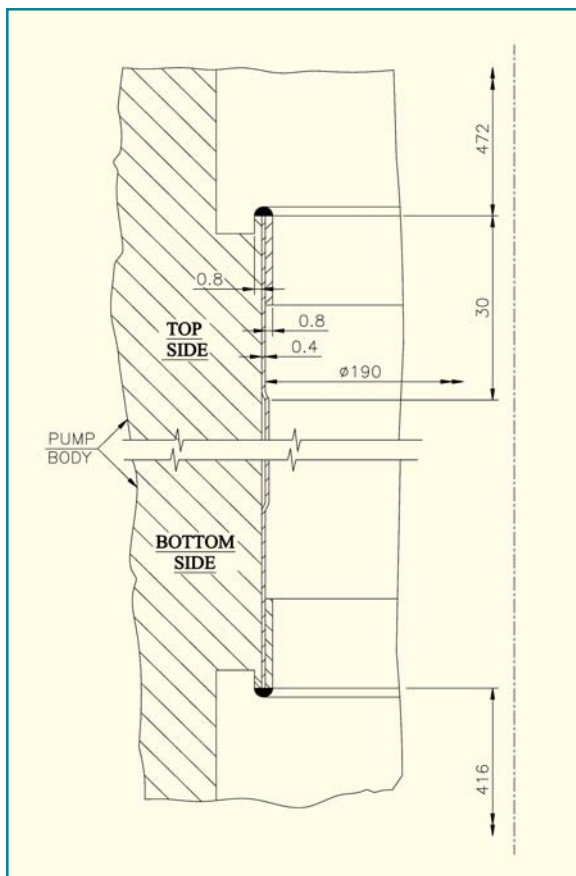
Detail of LIP joint for orbital welding
